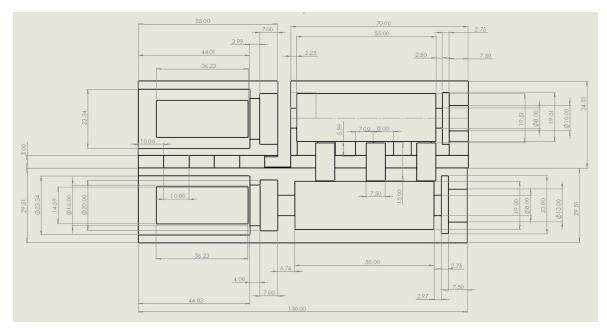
Depicted above is an aerial drawing of the Binder design. All dimensions are in millimeters, and a circle with a backslash denotes a diameter.
